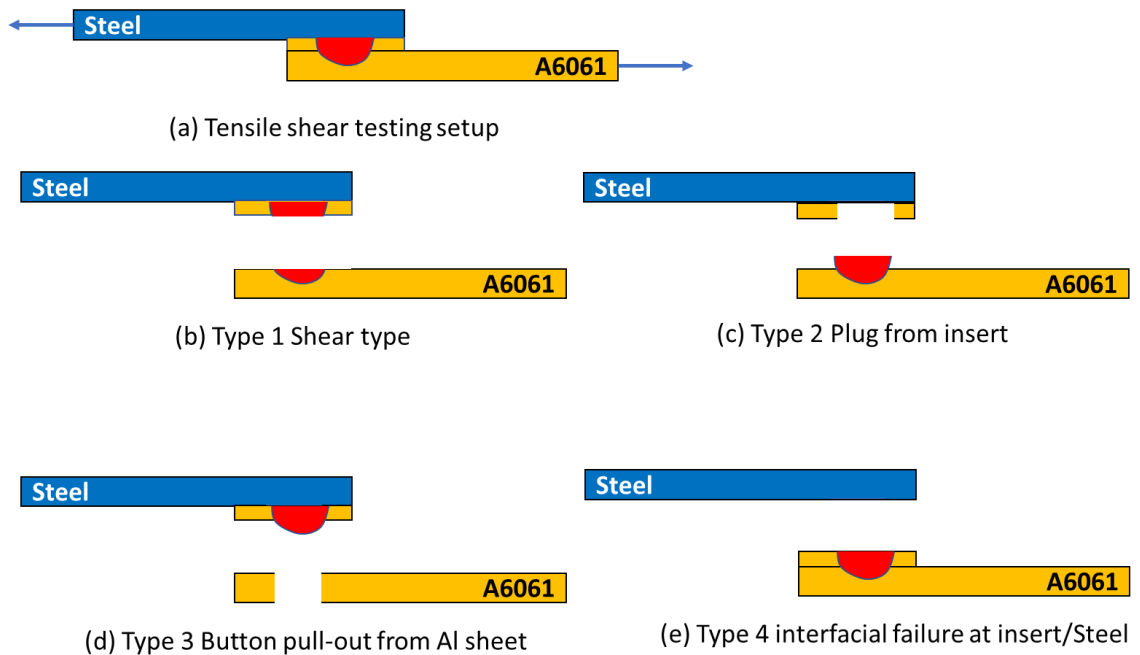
Fracture modes in lap shear tensile testing of U+RSW welded Al/steel joints
